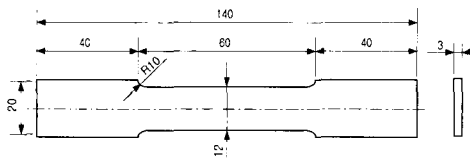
Geometry and dimensions of tensile test specimen (unit : mm)
